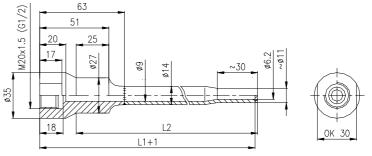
DIMENSIONAL DRAWING, TABLE OF DESIGNS AND WEIGHTS OF THERMOWELLS 13x0
